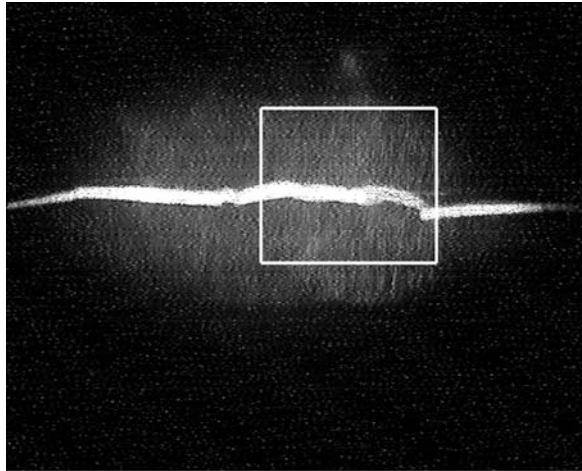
and 9 are the images of structured light projected onto the overlapped weld seams, one with no tacked weld point and one with tacked weld points.
